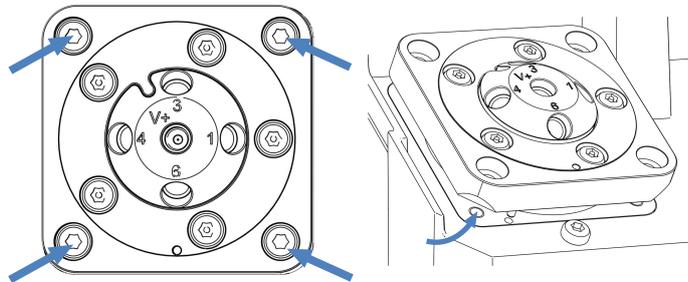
4 Screws fixing the injection valve at the VF- and VH-autosampler (left); levering up the injection valve (right)
